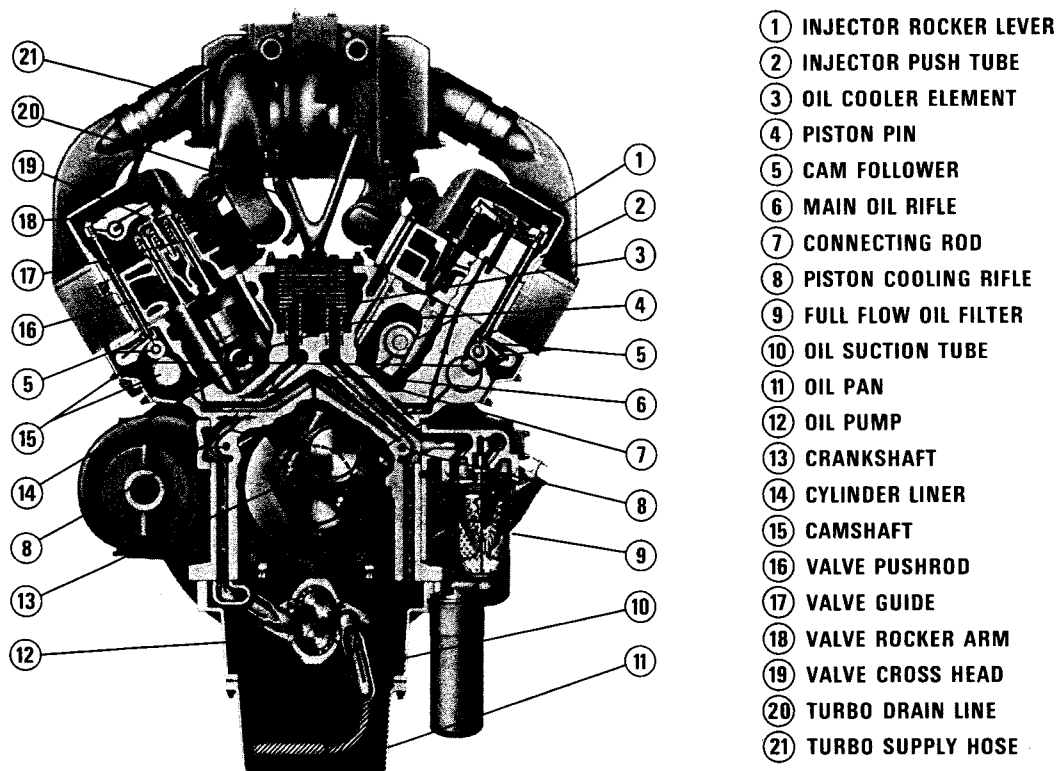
, (LWC-35). Front view standard lubricating oil flow — KT(A)-2300 Engine
